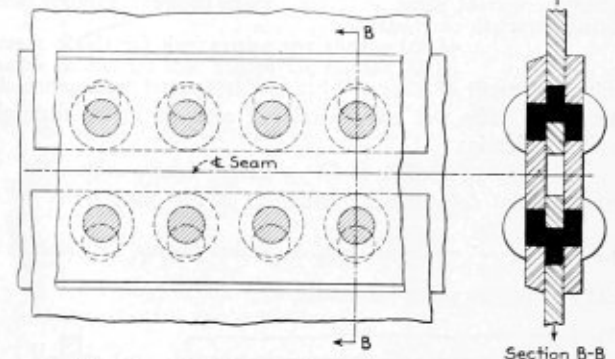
(b).—Rivet Failure by Double Shear
